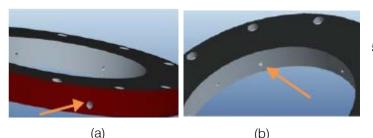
(a) : Oil ring showing oil inlet to oil ring, (b) Oil holes to supply oil to honing area of liner
